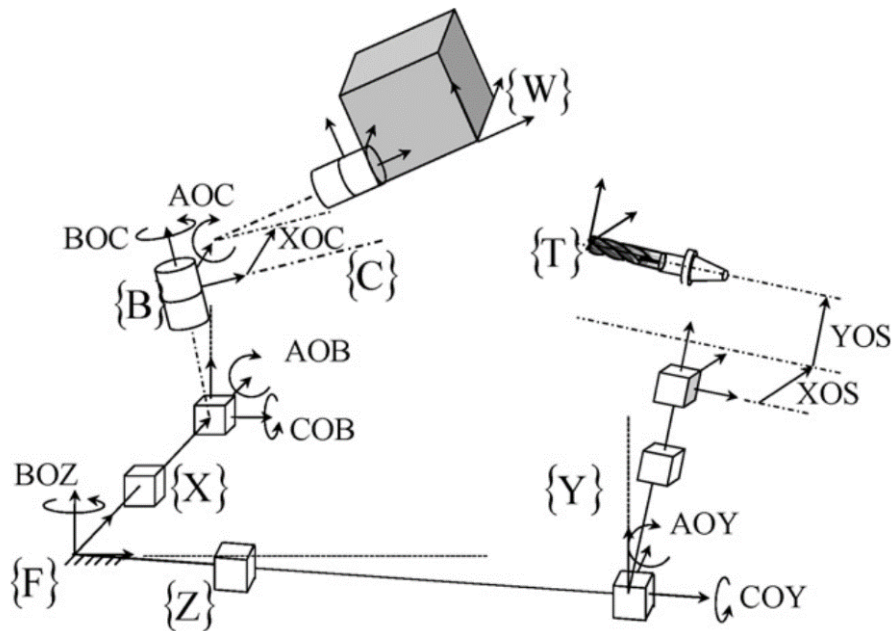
Axis location errors of a machine tool with WCBXFZYT topology (Mayer, 2012)
